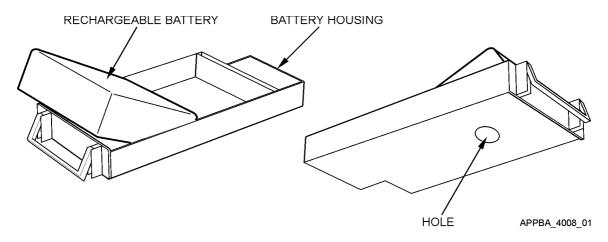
Install Rechargeable Battery In Battery Housing Assembly
